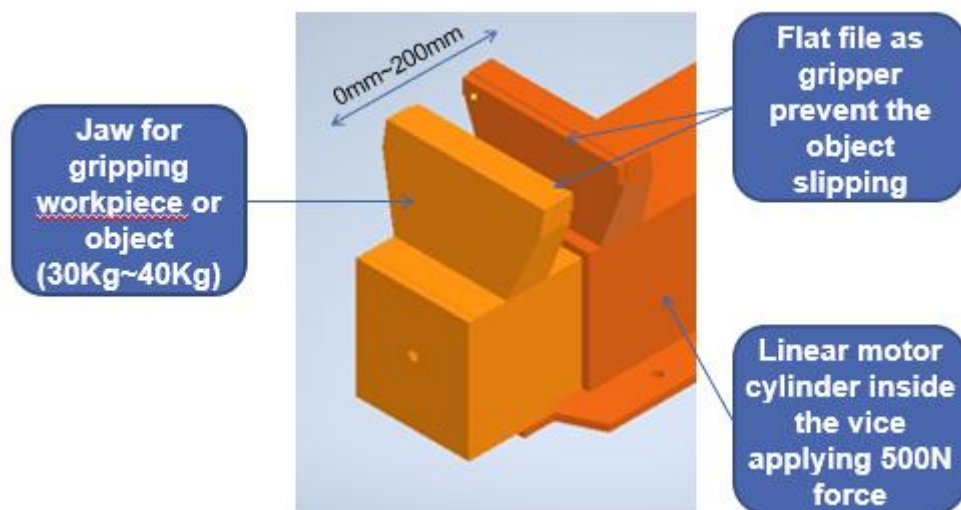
Closer Look Of The Drawing Of The Automatic Vise At Gripping Part
